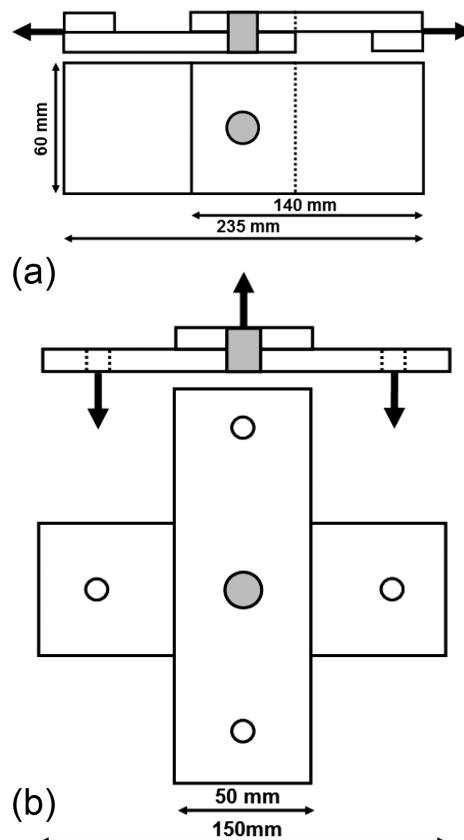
Test configuration and sample dimensions: a) tensile-shear test, b) cross-tension test
